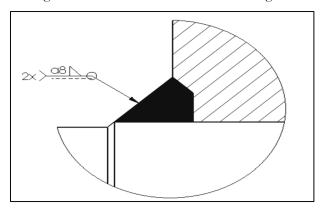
Sketch of a multilayer, circumferential fillet weld
